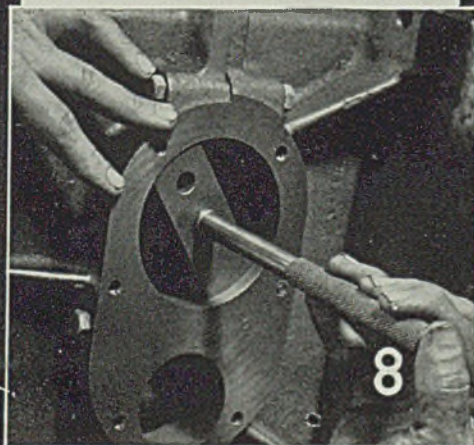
Special spherical "go-no-go" gages, accurately lapped and chromium plated, are used for checking bore diameters on gearmotor frames
